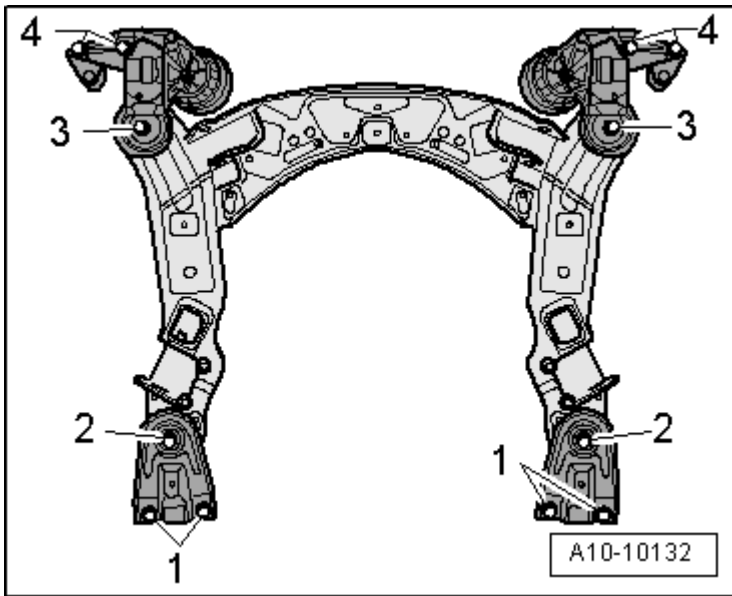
Engine Mount Plate Bolts Removal/Installing Sequence
